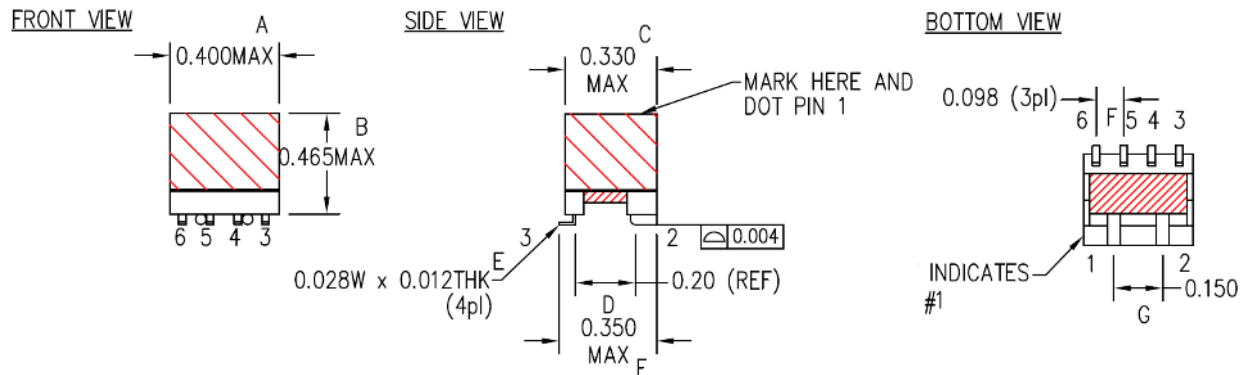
Renco RL-10950 Mechanical Drawing (dimensions in inches)
